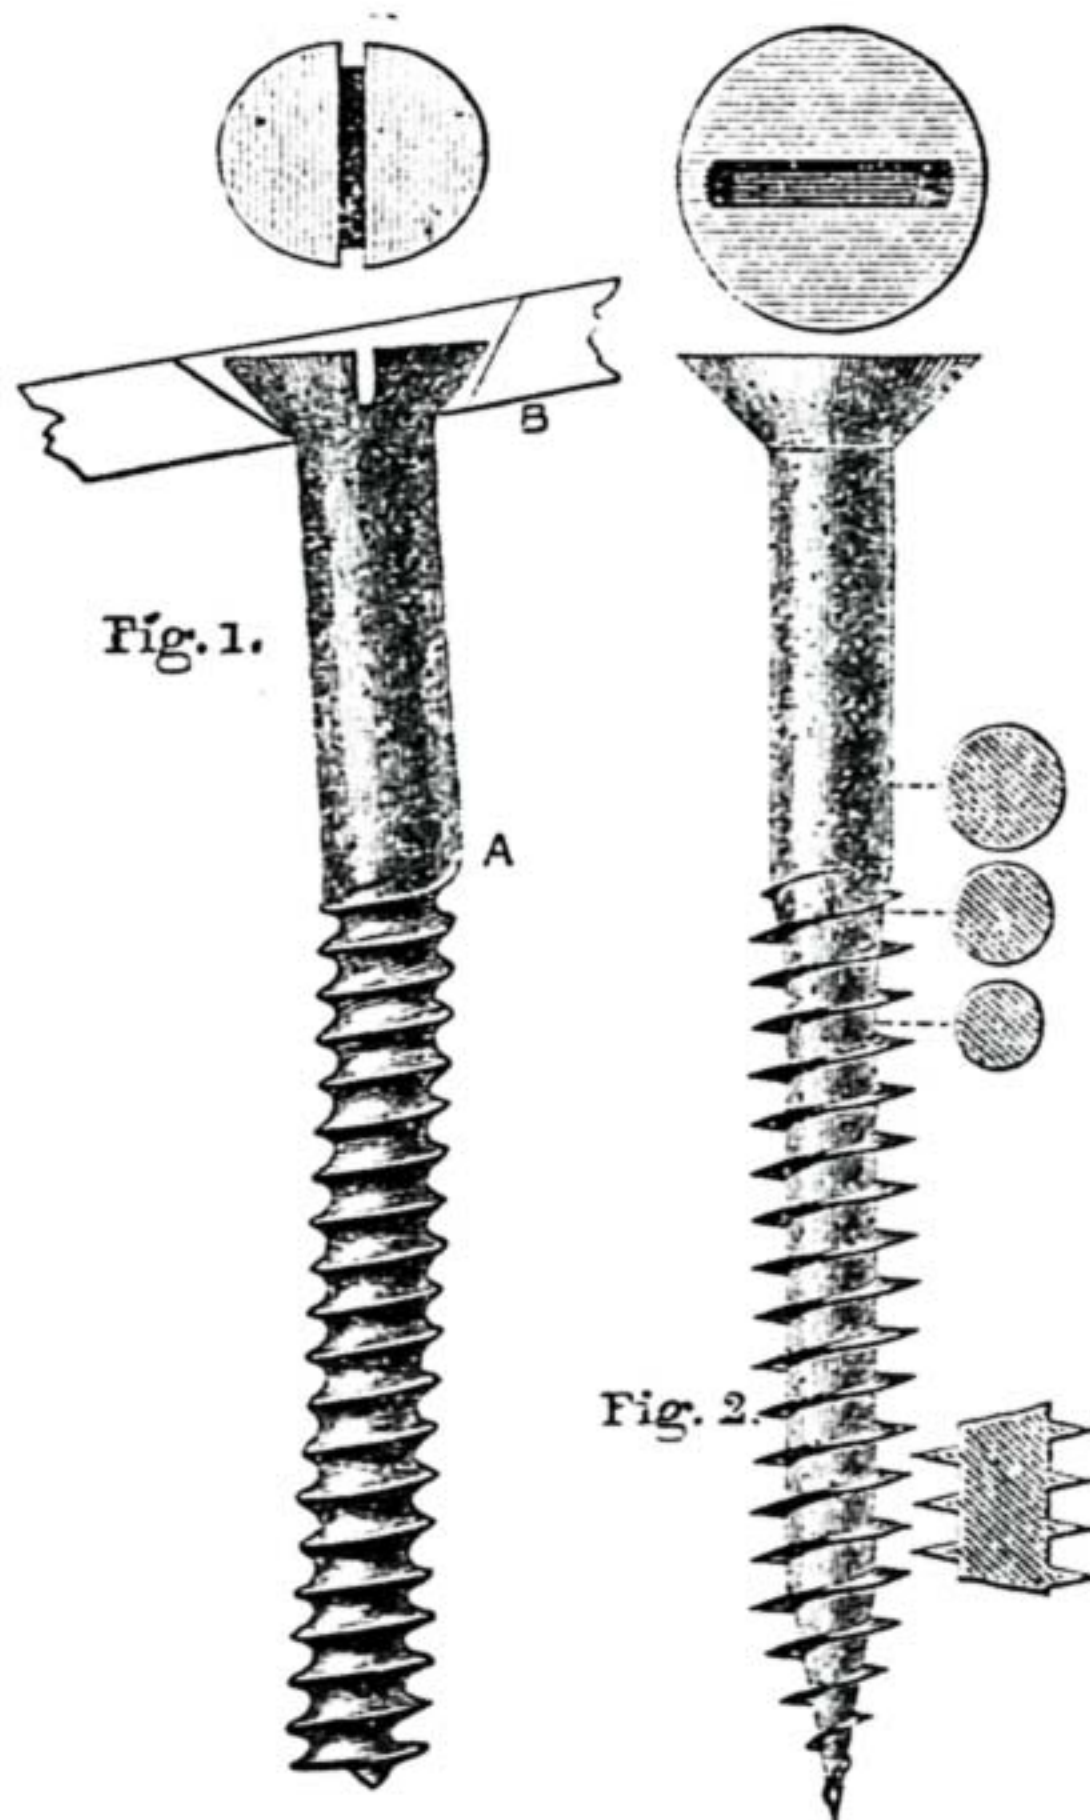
Old form of Screw, showing weak points, Fig. 2.—New form of Screw.
